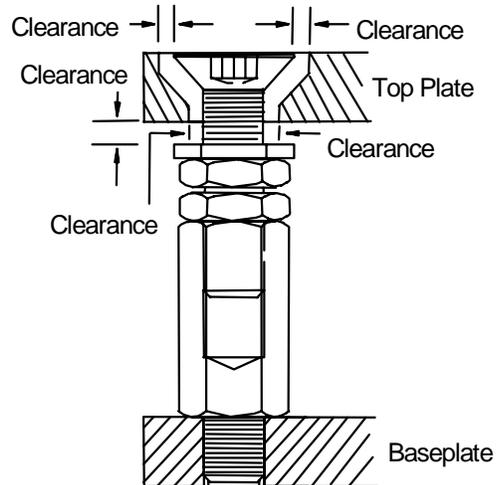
Hold-Down Bolt Assembly (Cross Section)
